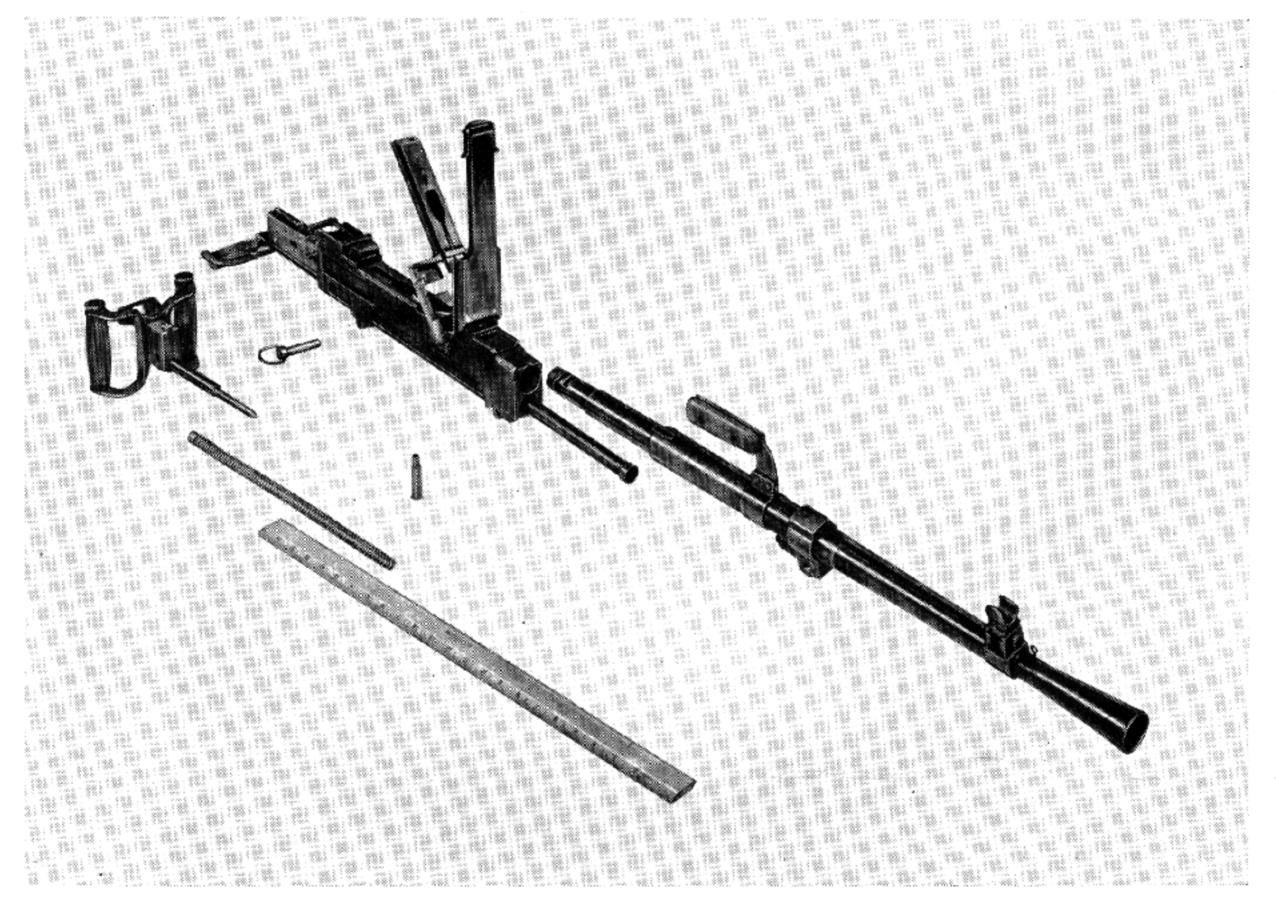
Stripping the SG-43, continued. The backplate group and the mainspring have been removed. The recoiling parts have been started out the rear by a pull on the retracting handle.
